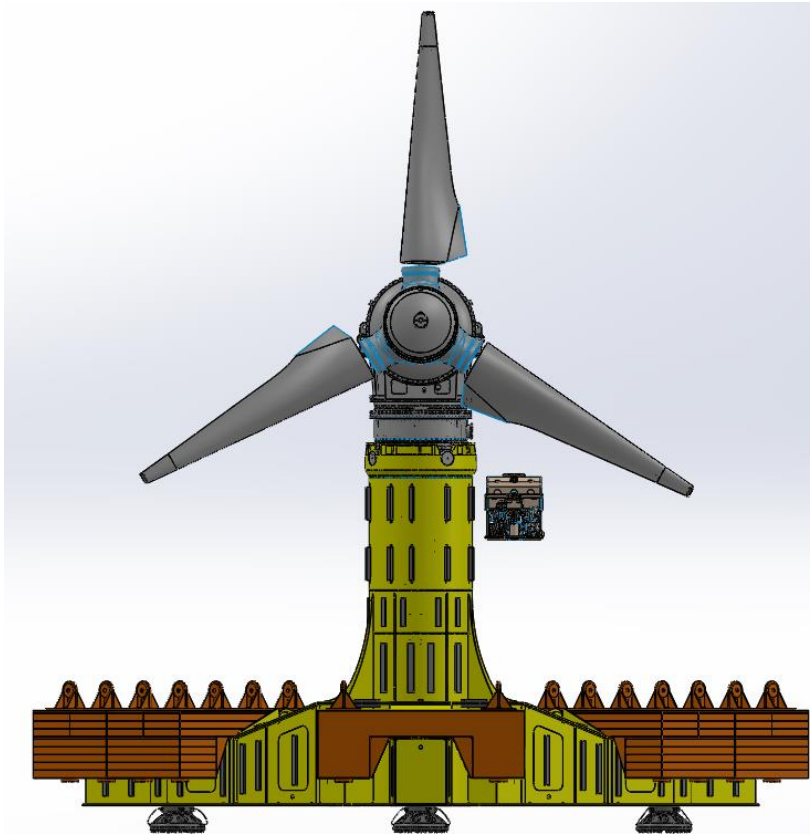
AHH TSS front view with a Millennium WCROV for scale
